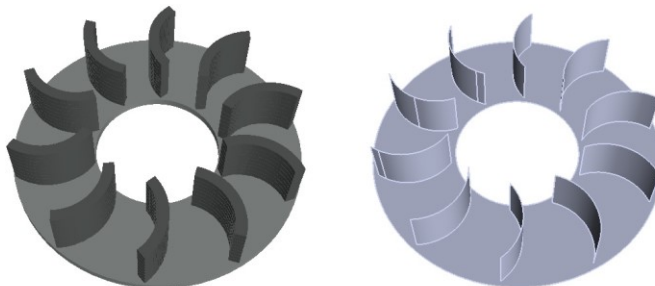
Final CAD (left) and midsurface (right) of an open impeller
